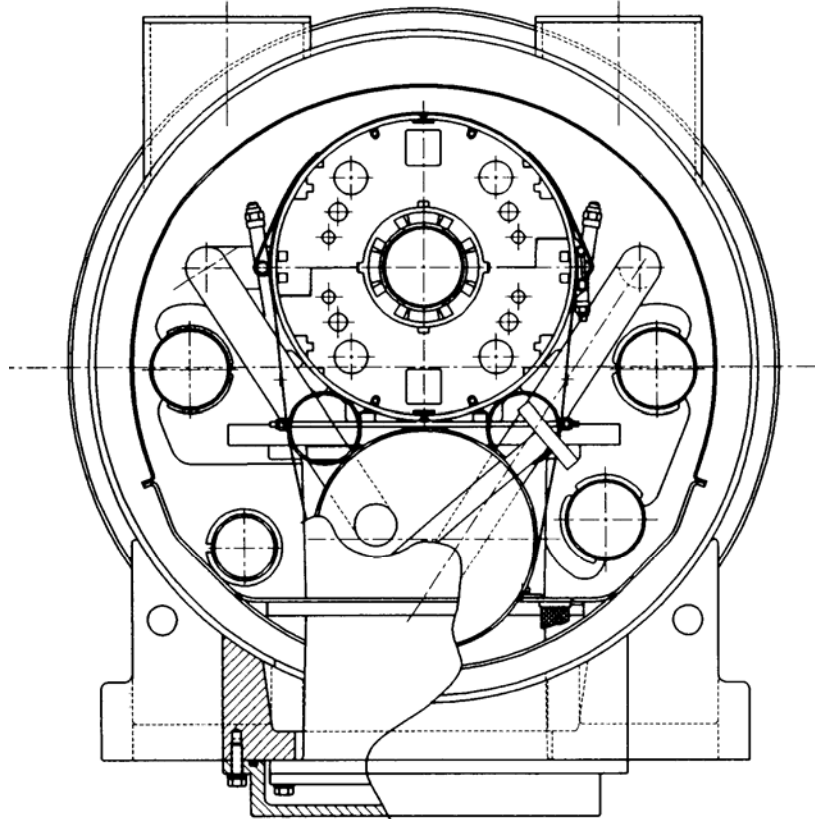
Quadrupole cryostat cross-section, showing re-cooler.
